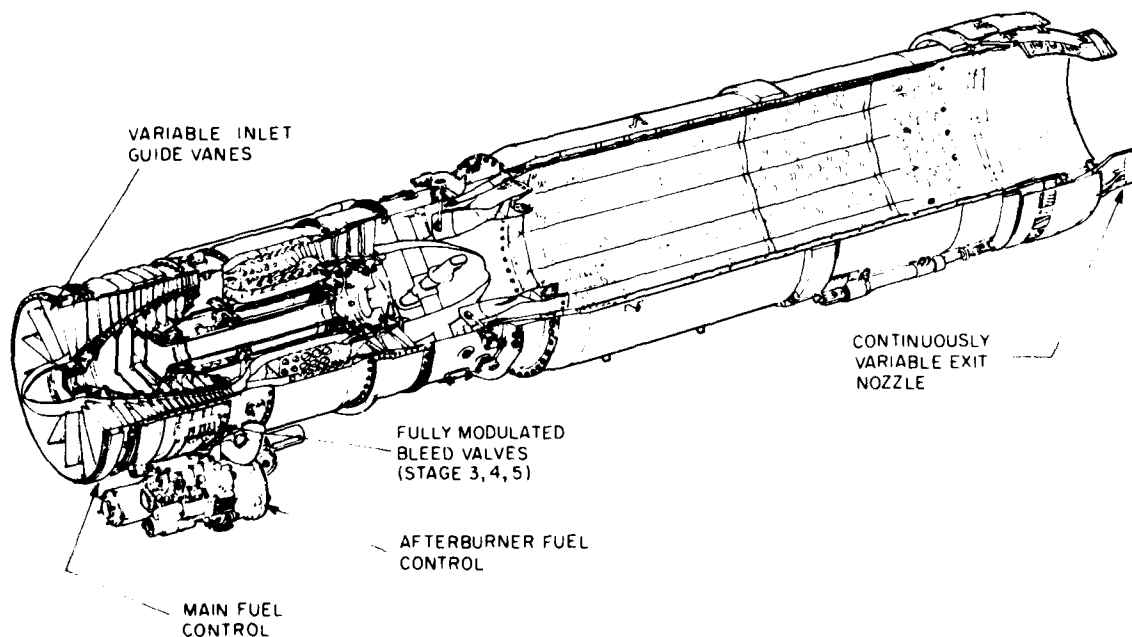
J85-CAN-15 CUTAWAY VIEW
